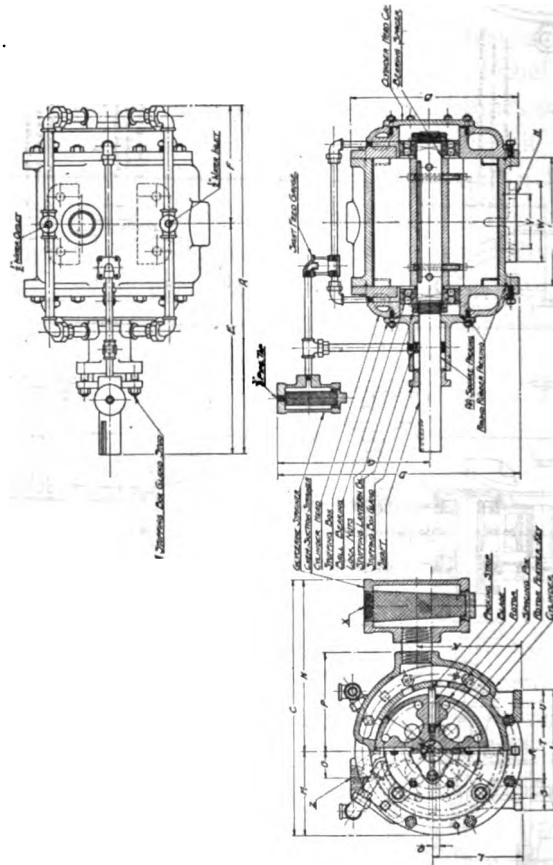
CONSTRUCTIONAL DETAILS OF ROTARY COMPRESSOR.
